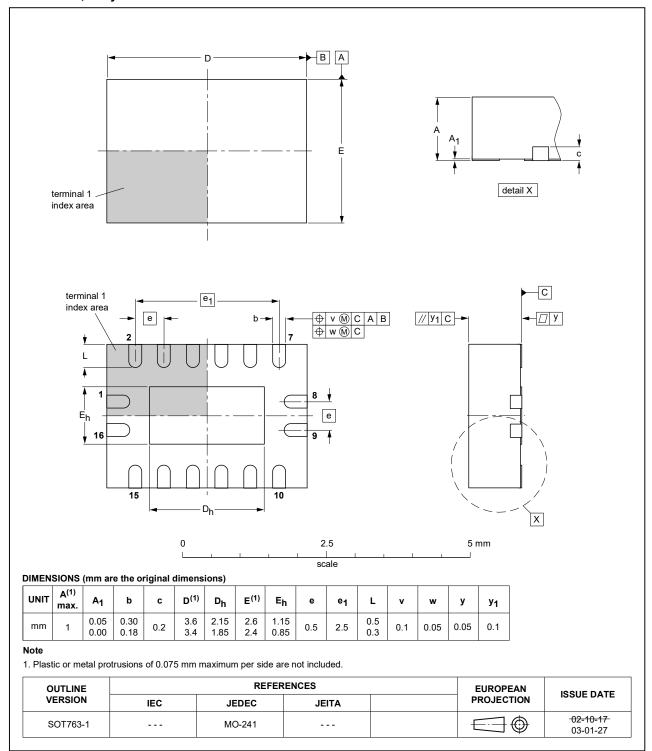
Package outline SOT763-1 (DHVQFN16)
